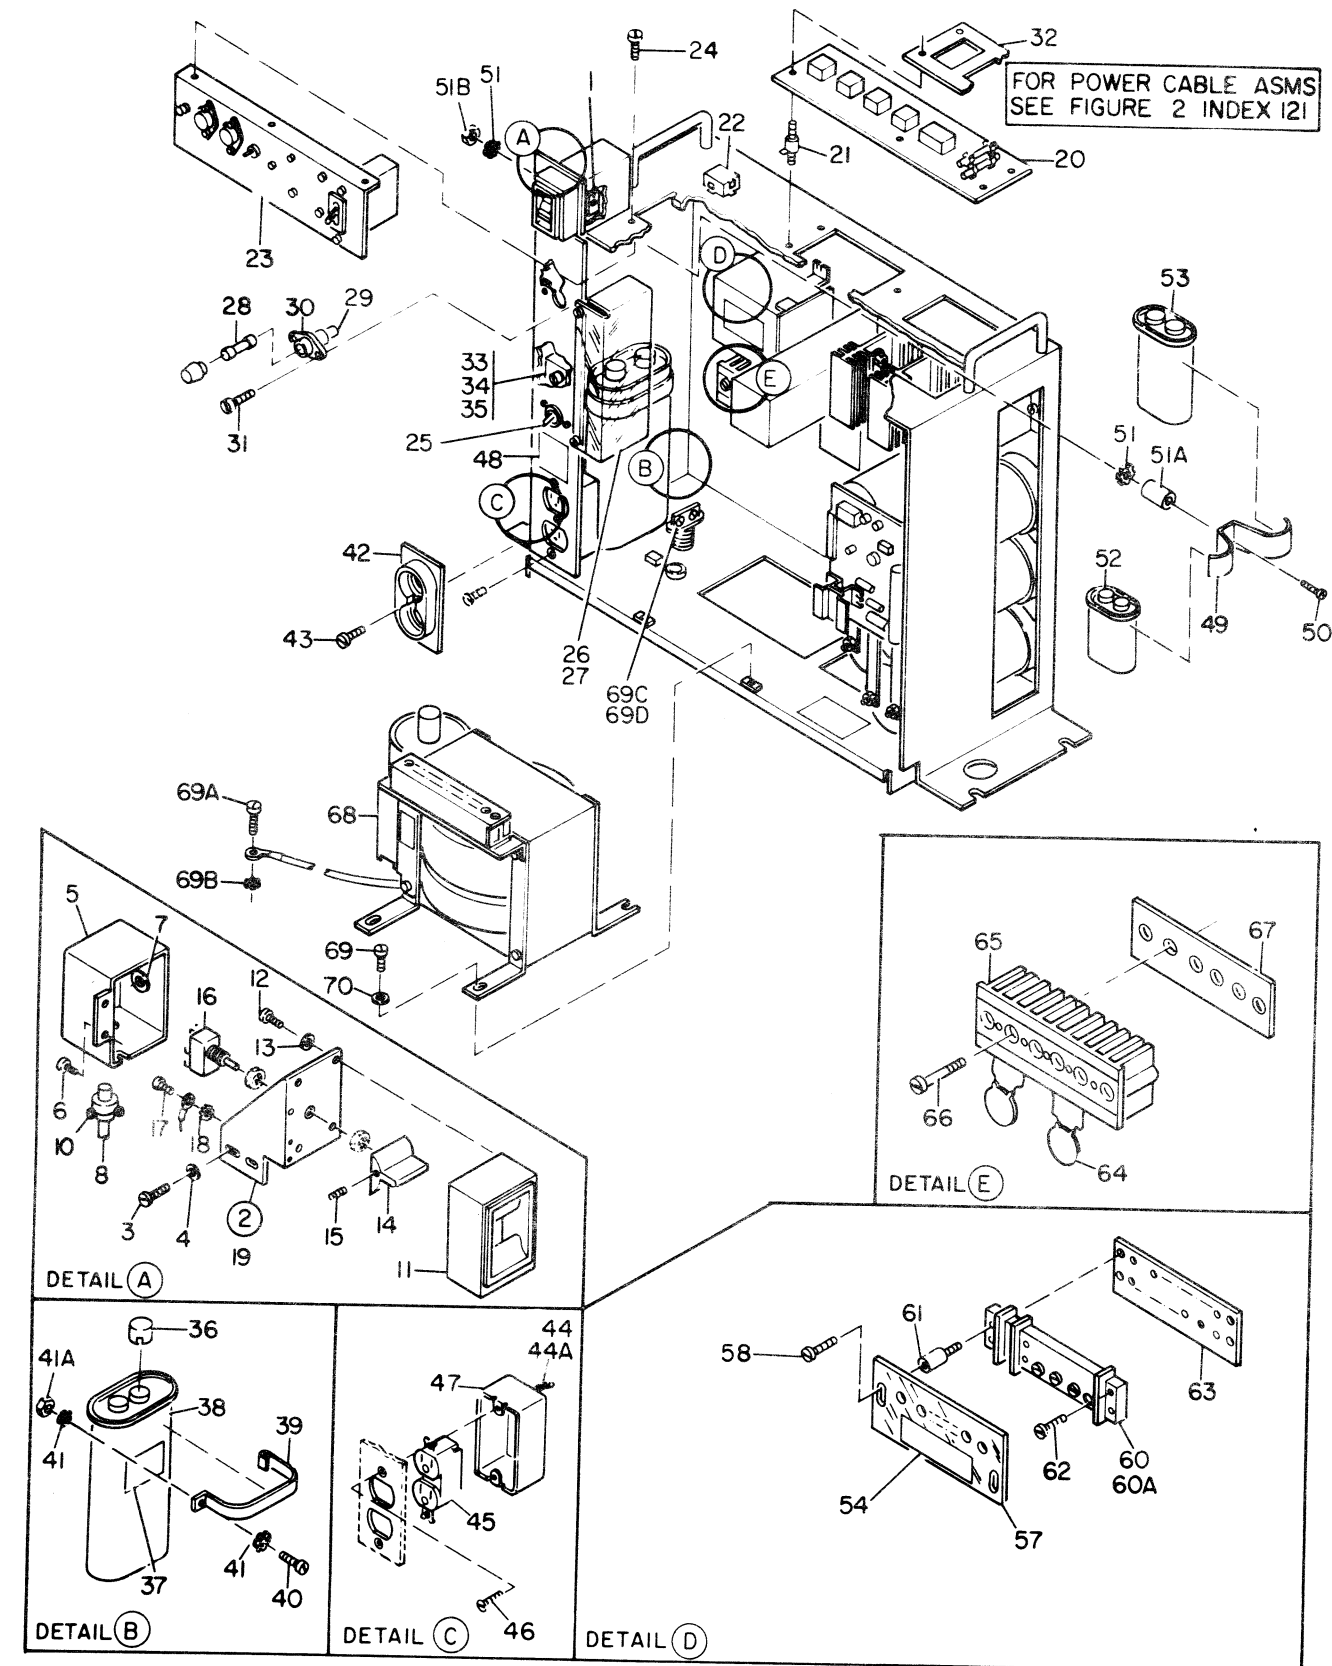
OPERATOR PANEL ASSEMBLY. SEE LIST 16.
